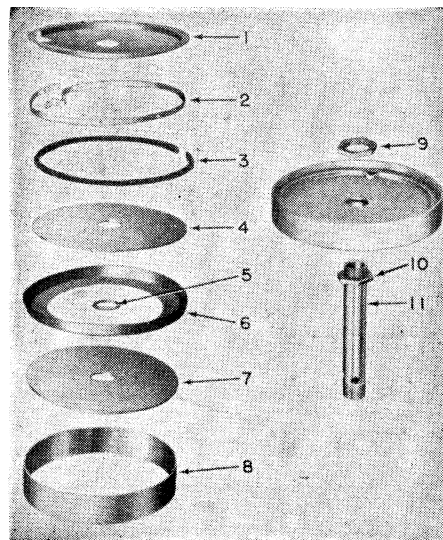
Disassembly of hydraulic cylinder end seal, hydraulic and vacuum push rod seals
